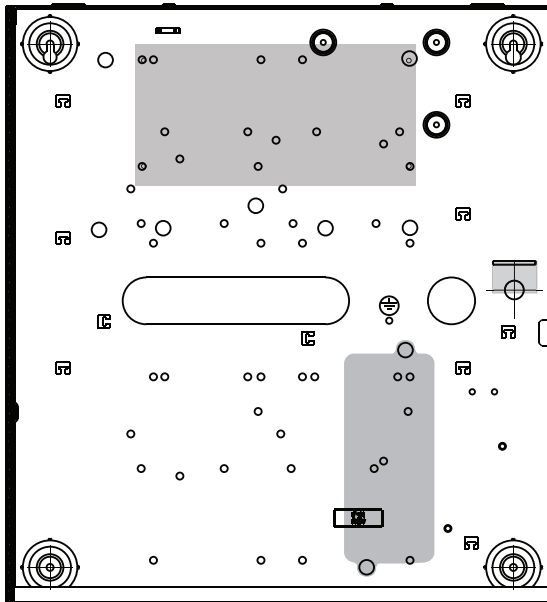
HSM3304CX/HSM3350 Mounted in HSC3010C, HSC3010CR, HSC3030CAR Enclosures
